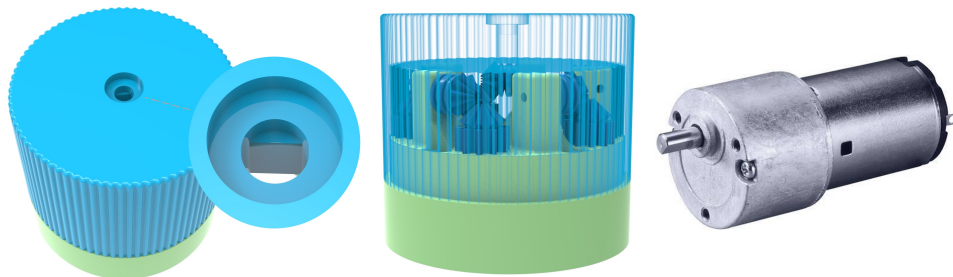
Gearbox with enclosed internal gear, containing a shape lock for the axis of the motor shown on the right [6], used for automated actuation.
